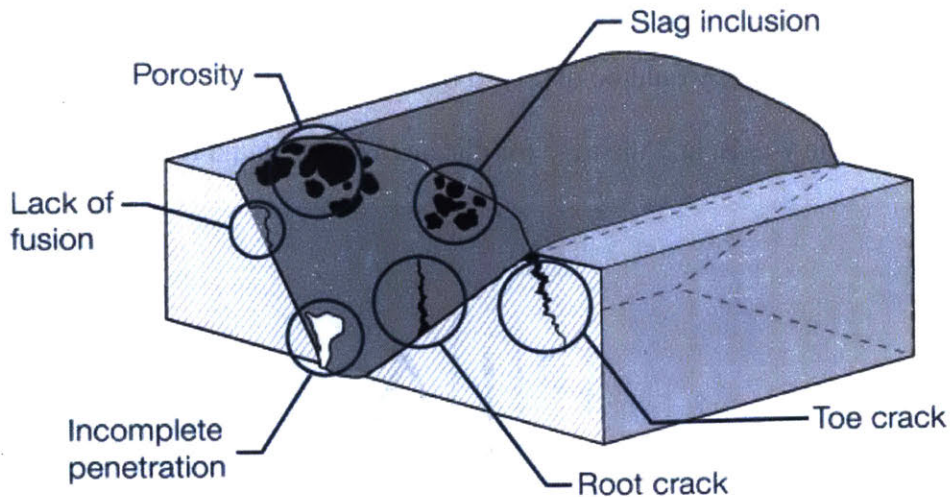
SUB-SURFACE WELD DEFECTS (OLYMPUS IMD, N.D.)
